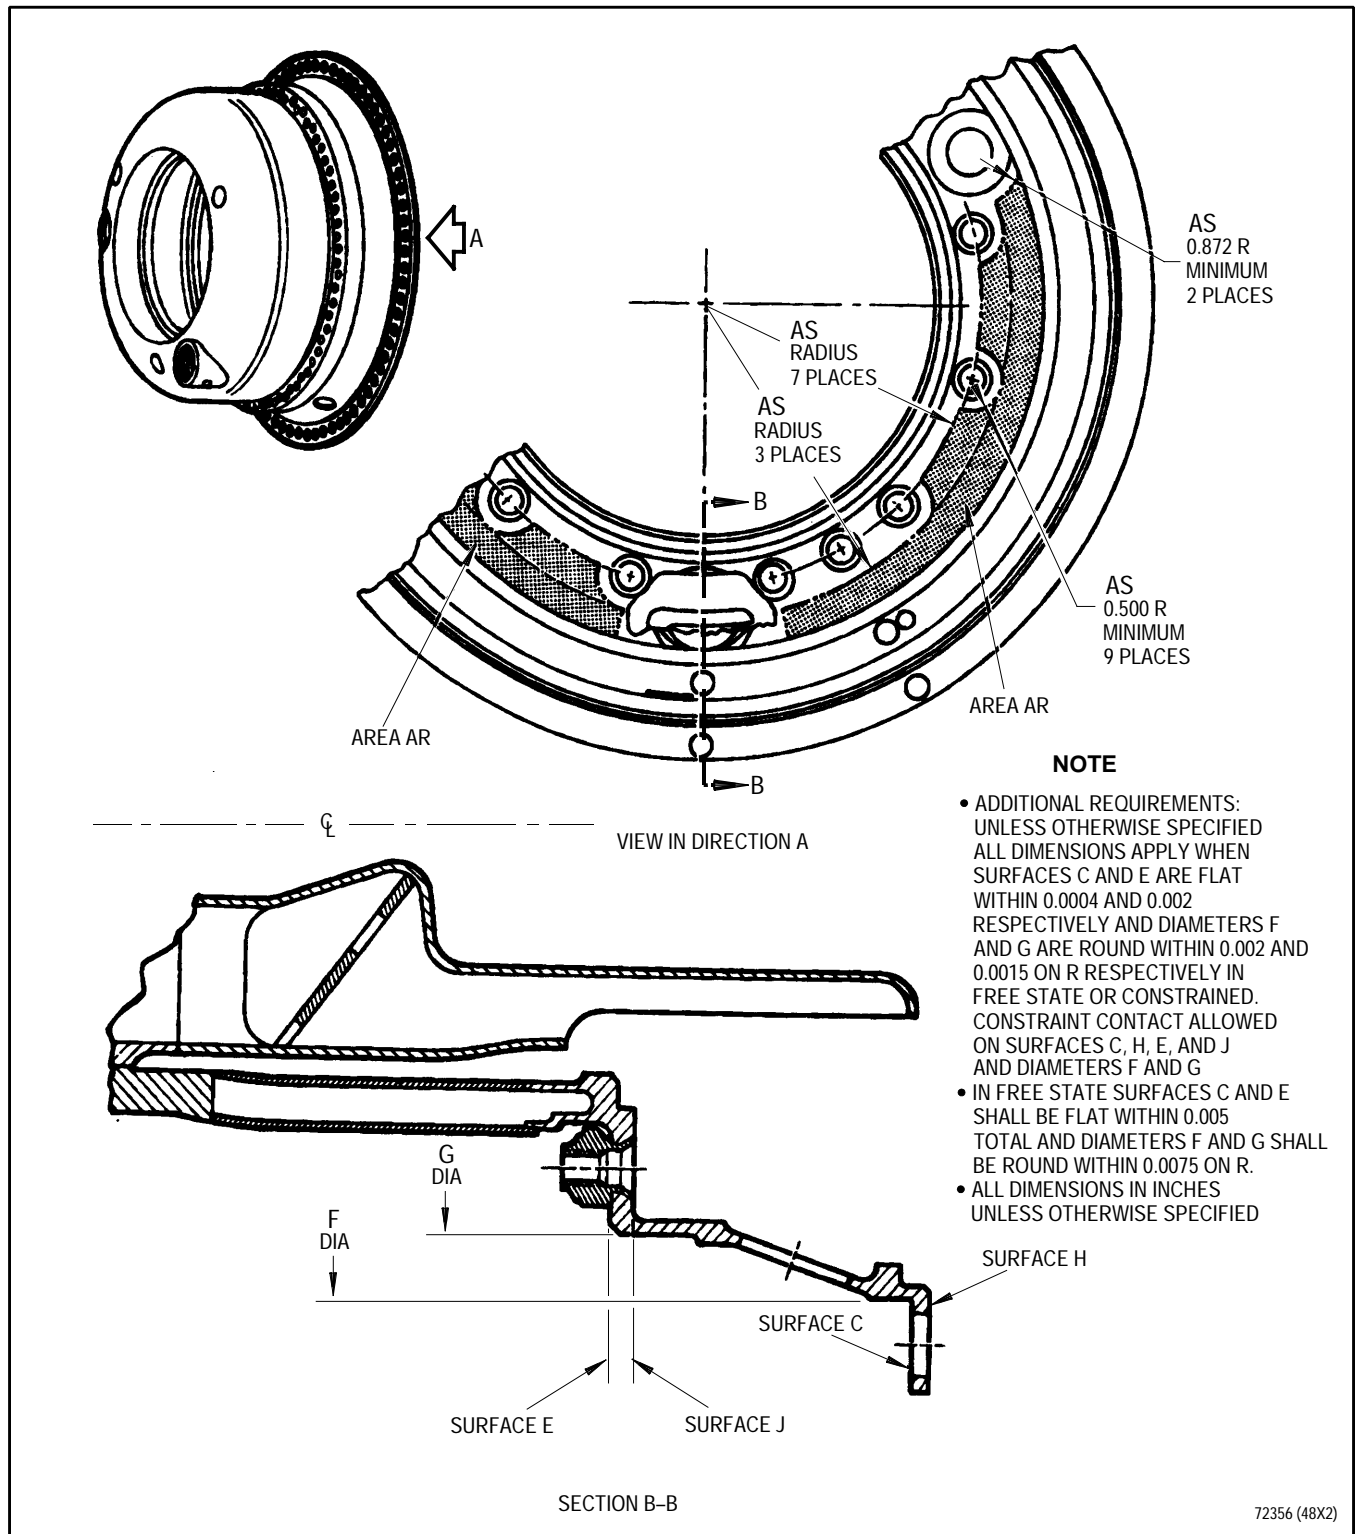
No. 4 Bearing Front Seal Support Assembly - Heat Shield Dent Weld Repair
